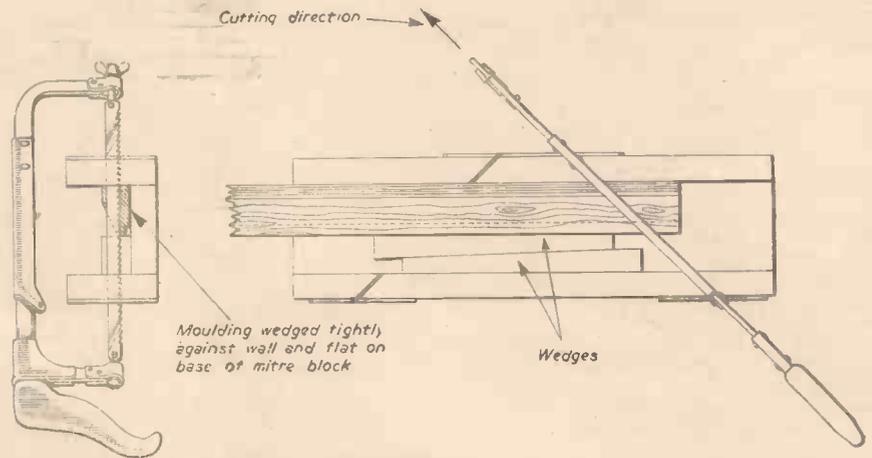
Showing the method of using wedges for holding the moulding firmly in place in the mitre block.
